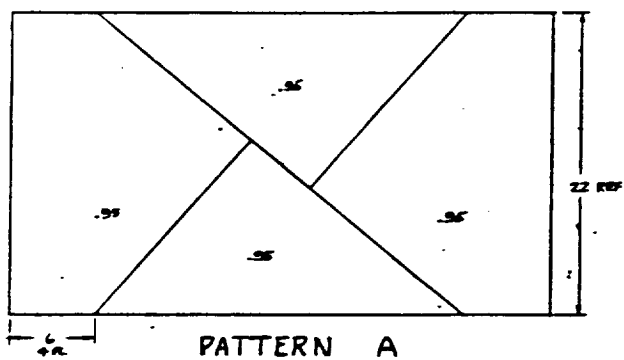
SPECIMEN PATTERN LAYOUT SKETCHES
